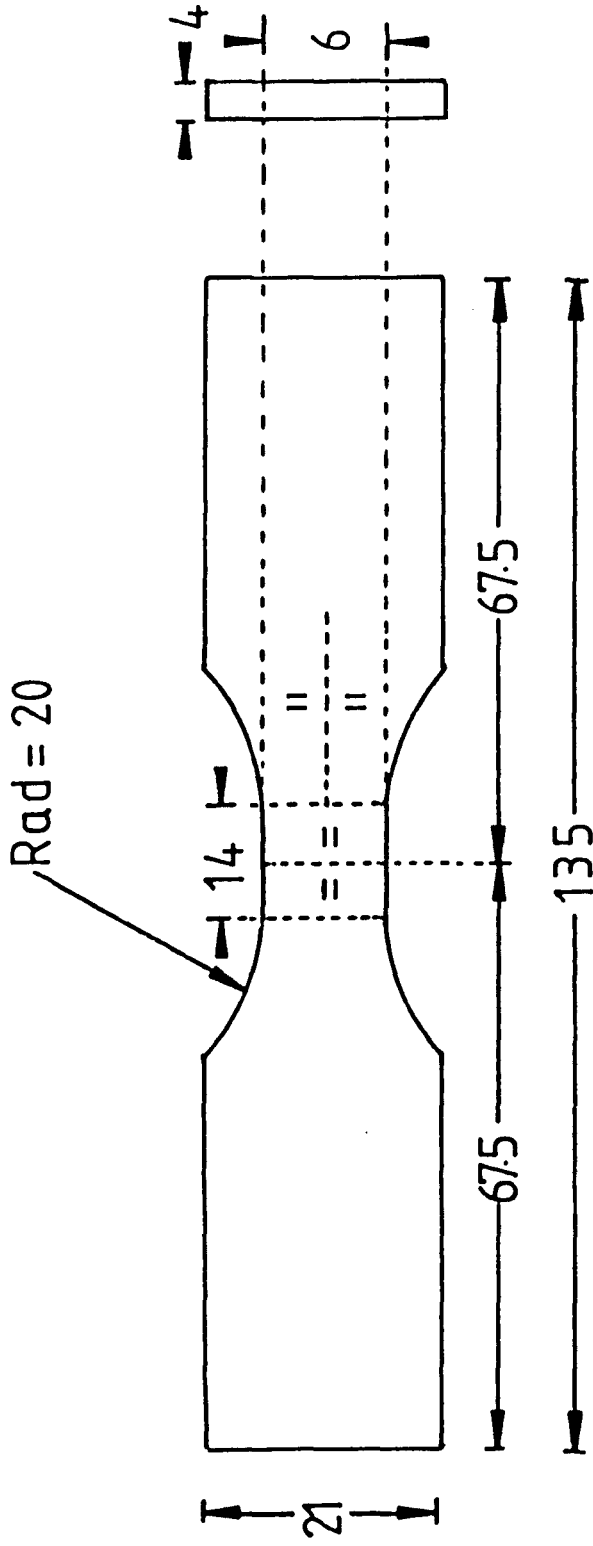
F.G.8 fatigue specimens. Dimensions in mm.
